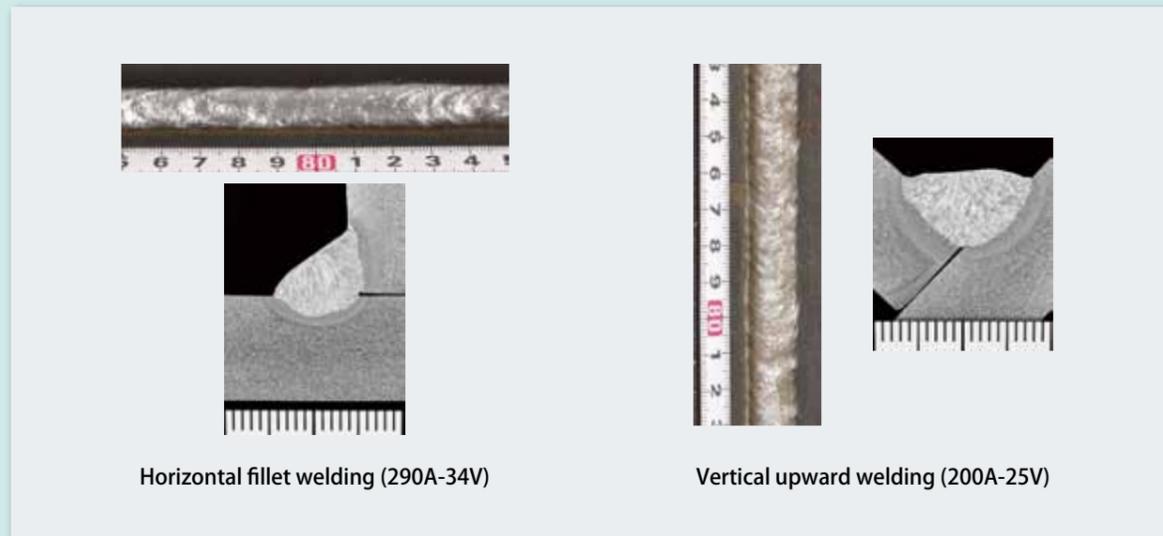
Bead appearances and cross-sectional macrostructures by welding positions
